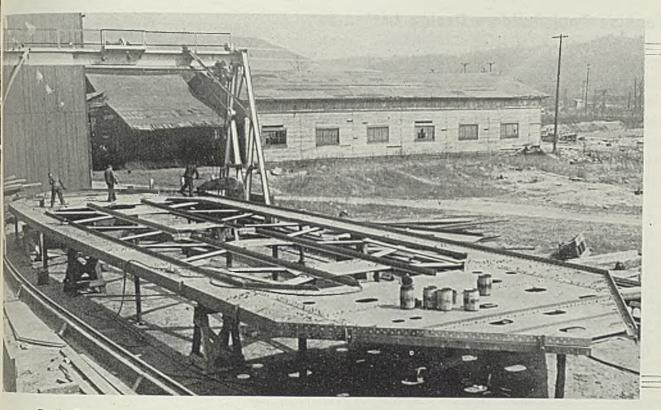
This is a large steel frame in which the rivets are being driven cold using an Osborne compression-type riveter seen working at the far corner of the frame. Its general appearance is that of a large C-clamp. See closeup of this same operation in Fig. 2
